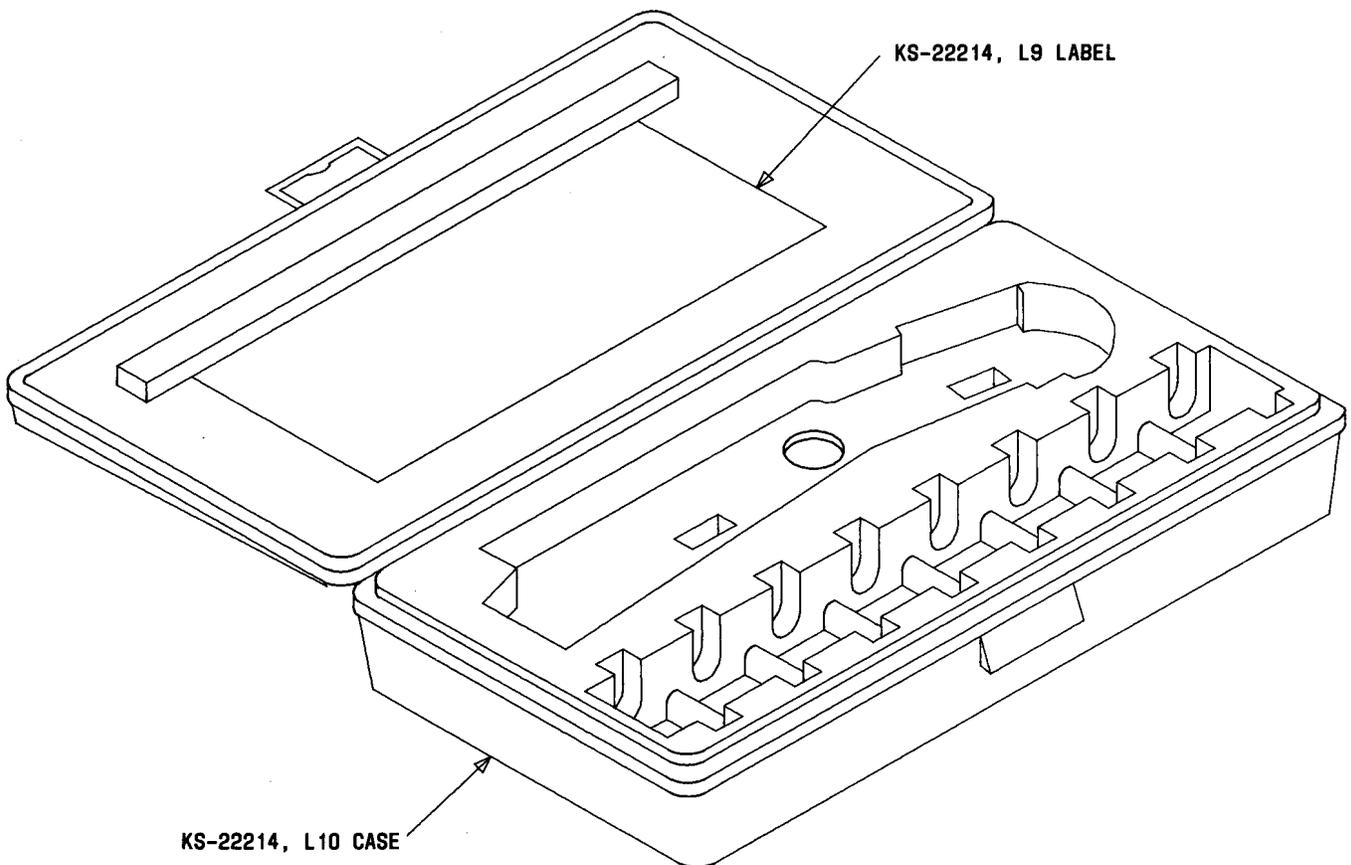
KS-22214 Crimping Tool Kit (Contd)
